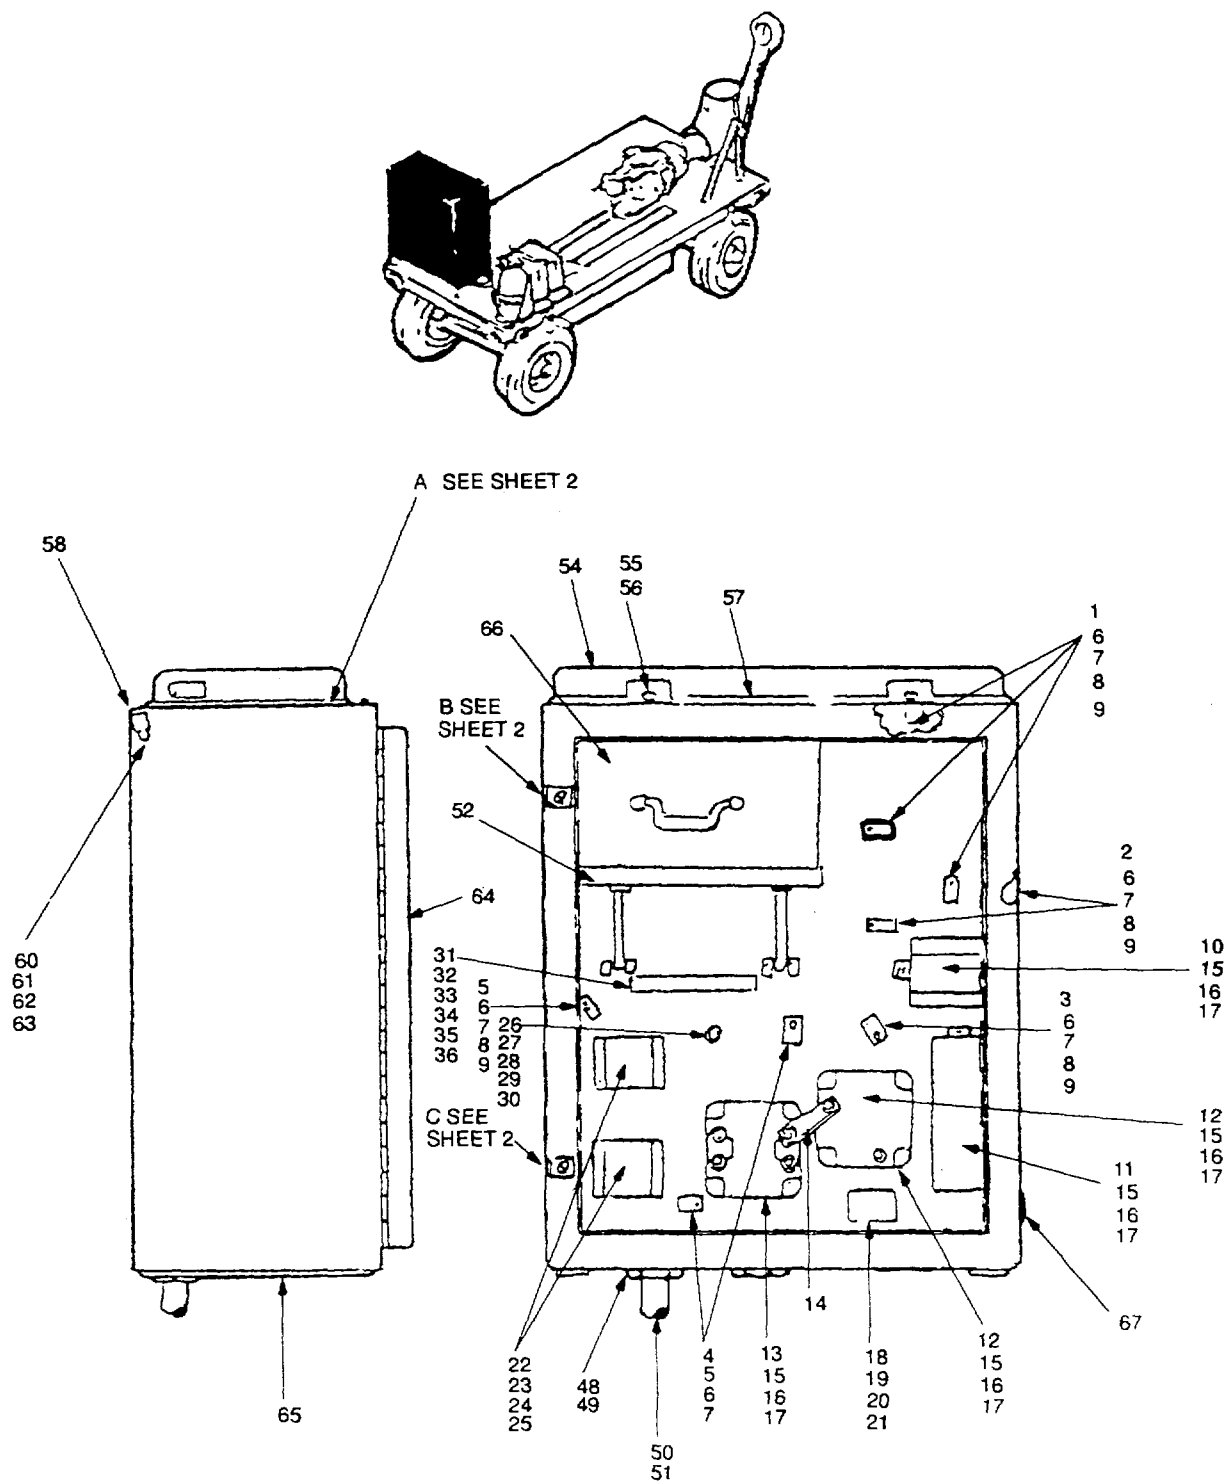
Control Console Assembly (Sheet 1 of 2).
